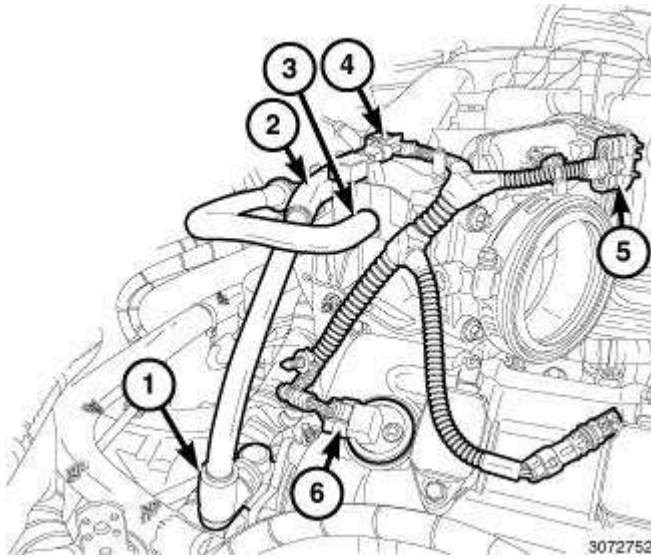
PCV Valve, Intake Manifold, Brake Booster Vacuum Hose, MAP Sensor, ETC & CMP Sensor Electrical Connectors
